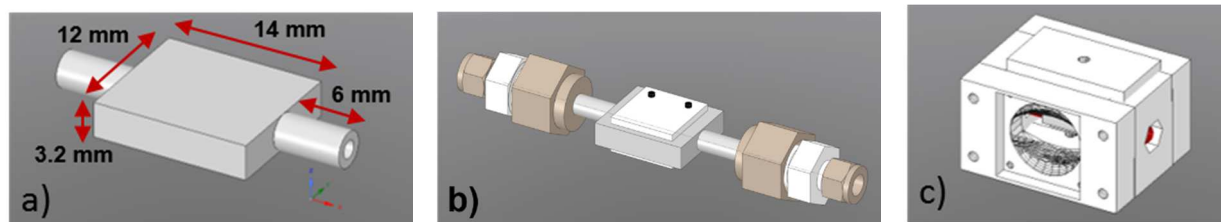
μ AP2 3D design: (a) aluminium block; (b) aluminum block, Swagelok standard connectors and ceramic resistances; (c) first draft of the housing of μ AP2 prototype including two fans for rapid cooling.
